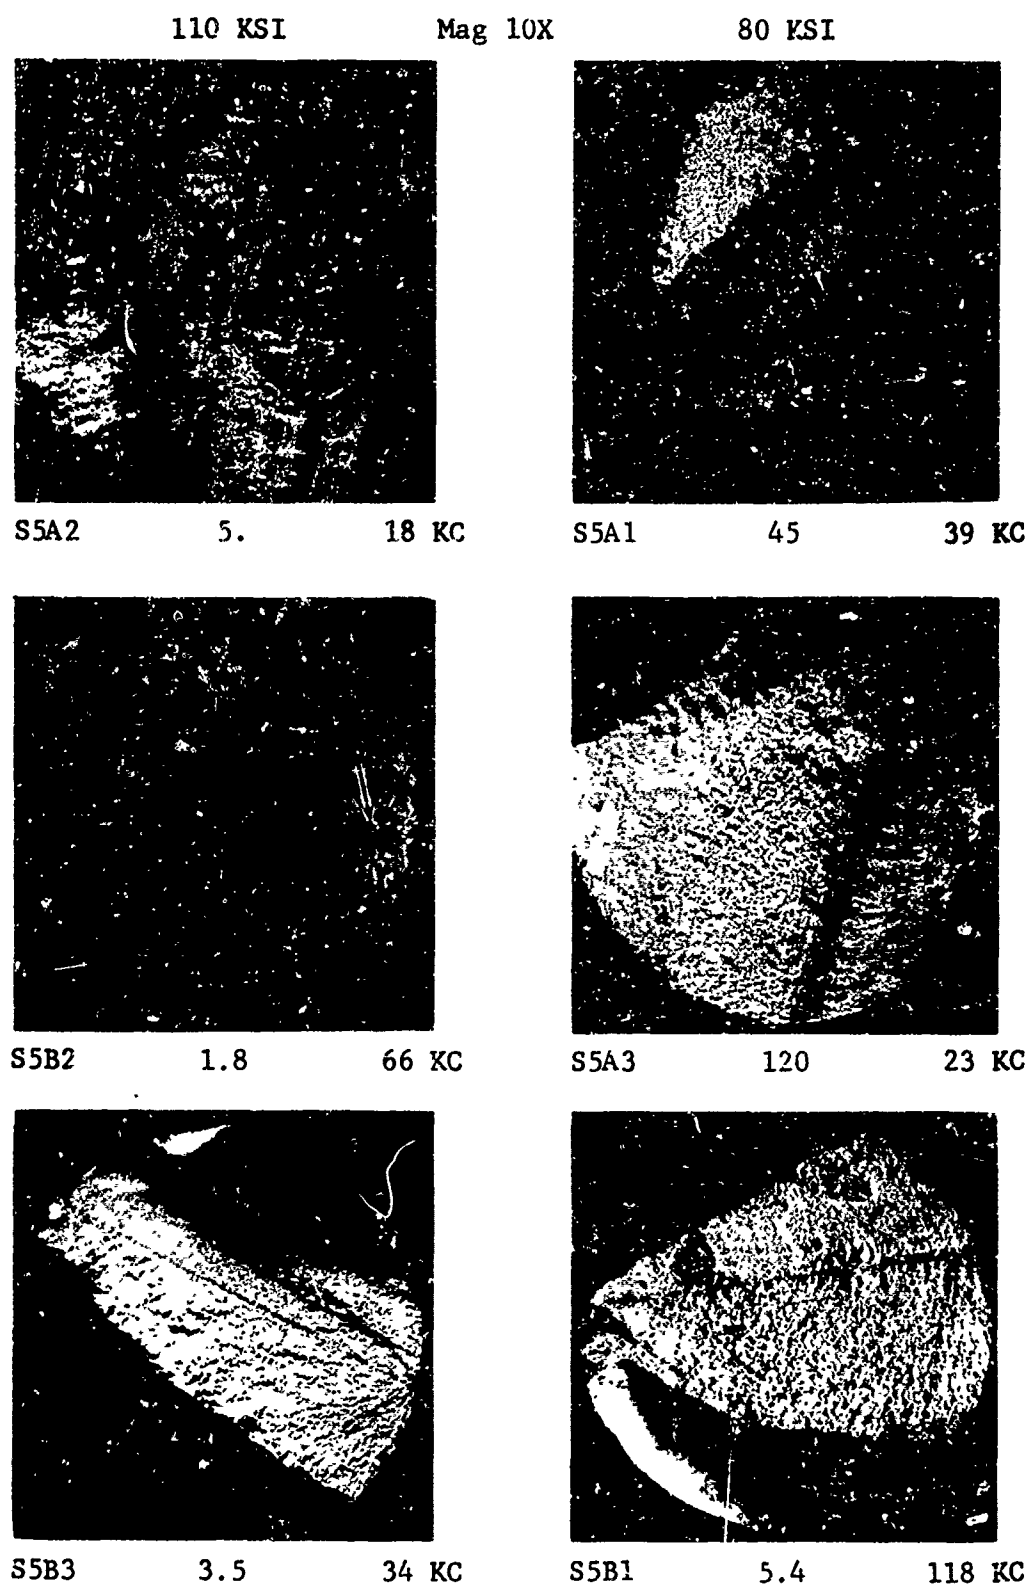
Fracture Surfaces of Failed Fatigue Specimens Series S5-
